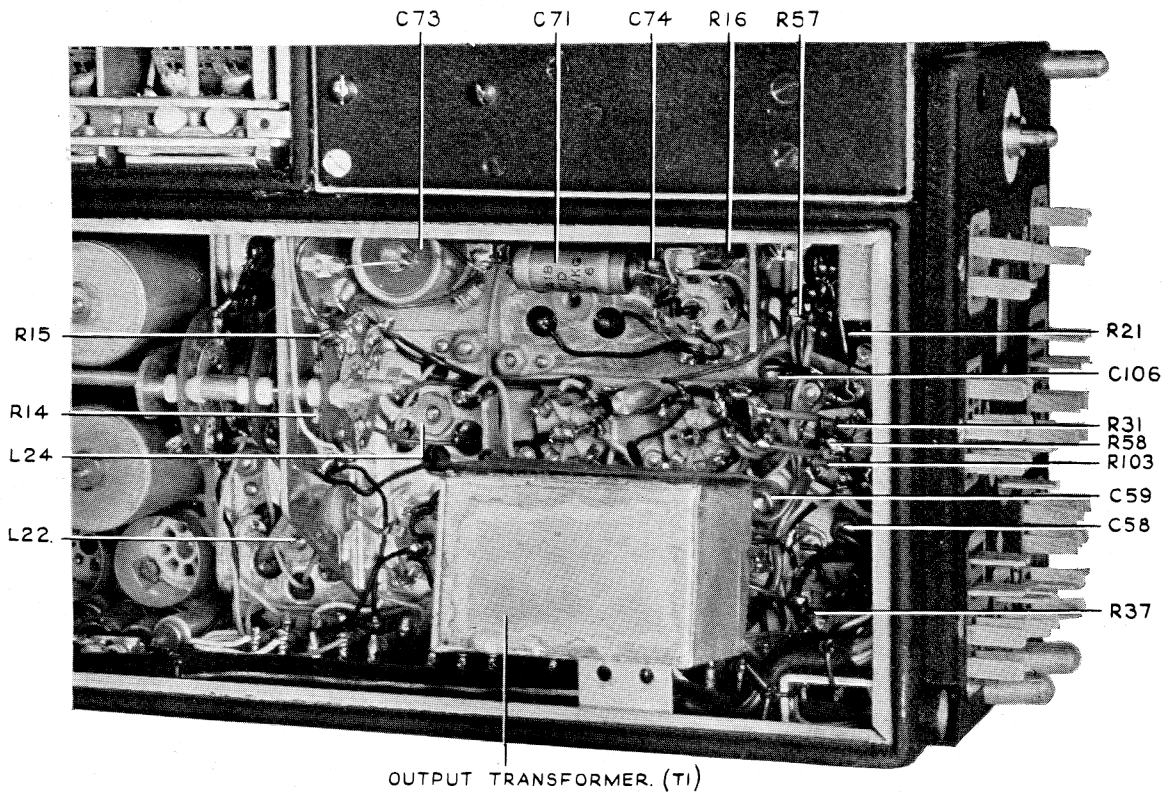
RECEIVER TYPE AD.7092. COMPONENT LOCATION, RIGHT HAND SIDE. 5061
